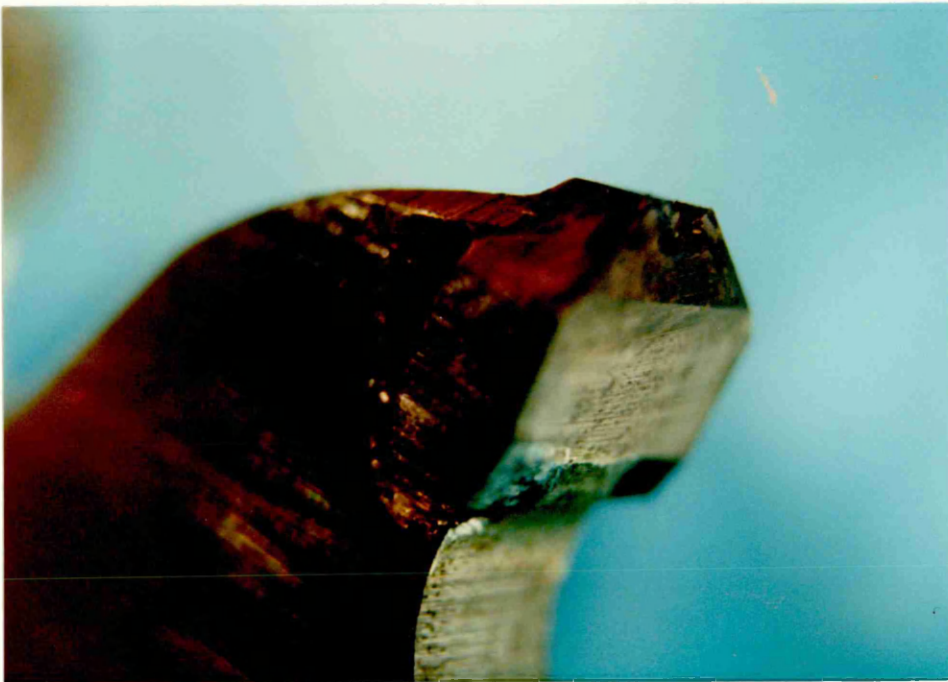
The cracks generated on the rake face, spread across the cutting edge
